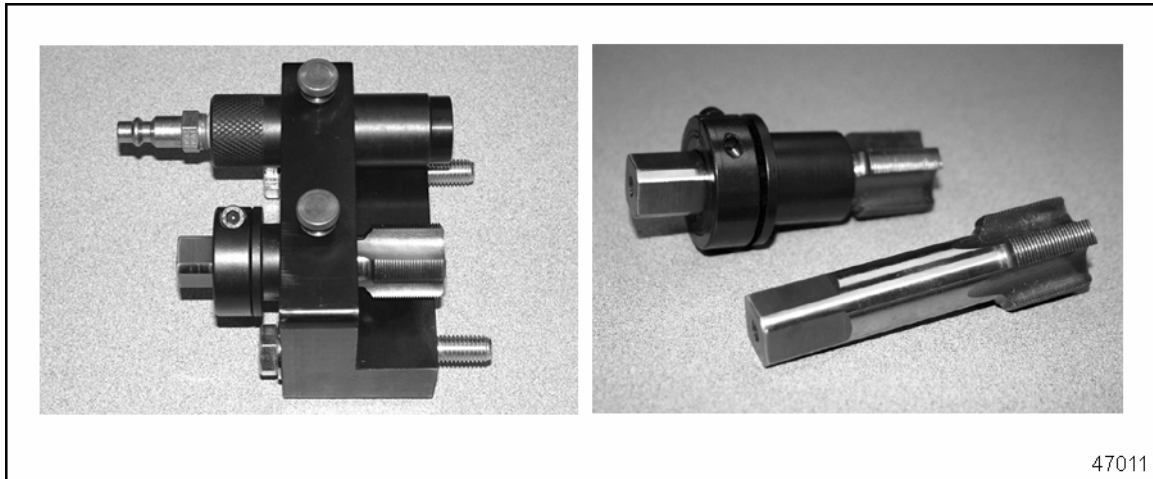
Adapter Block and Tapping Tools Kit J-47485
